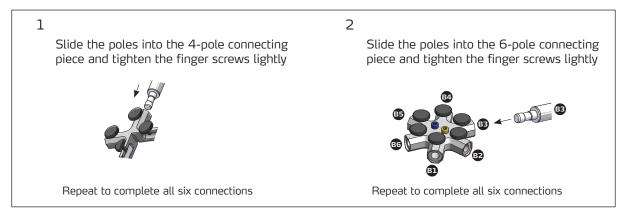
Mounting the upper poles and the top 6-pole connecting piece.
